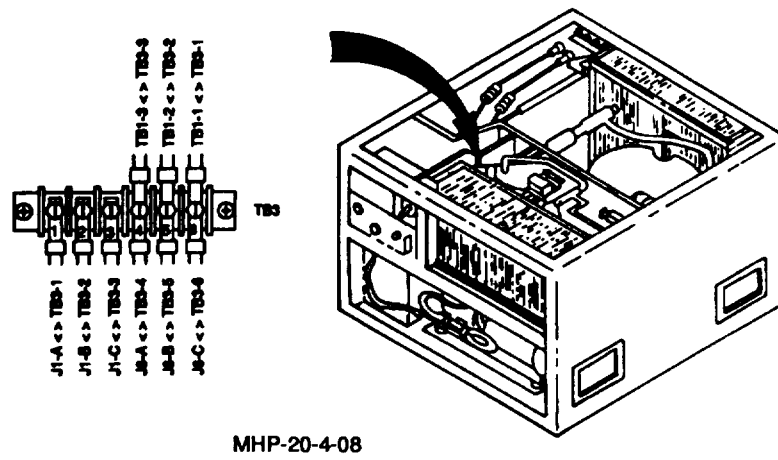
Connector J11 (Through J6) Wired at Terminal Board TB3 (Three Phase)
